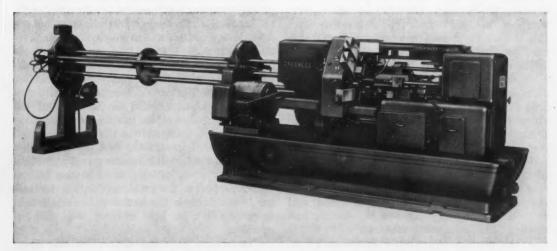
Six-spindle, 1-inch bar automatic with high-speed spindles and air feed
